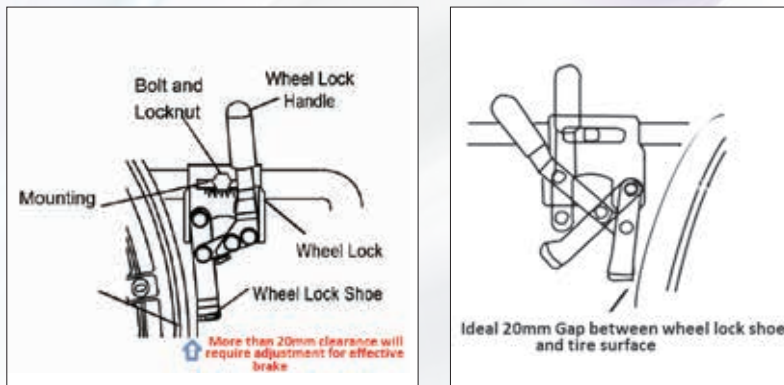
Clearance and Adjustment between Wheel Lock and Tire Surface
